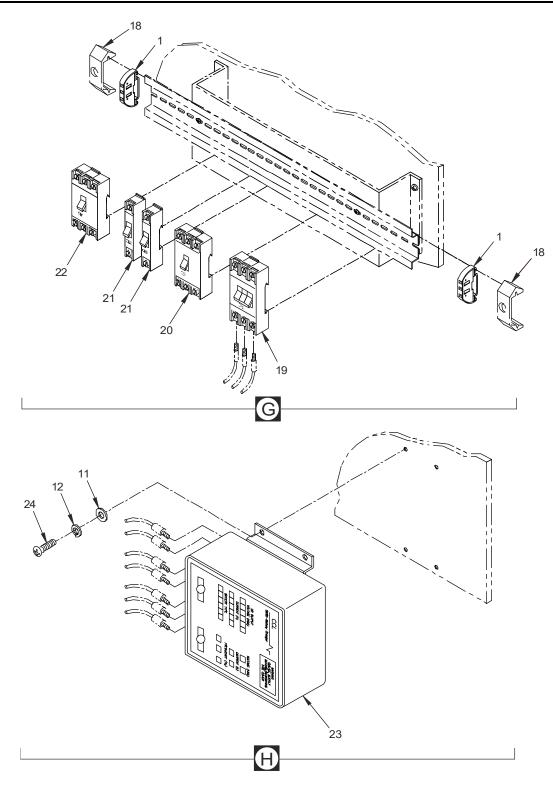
Barrier Panel Assembly (Sheet 5 of 7).
